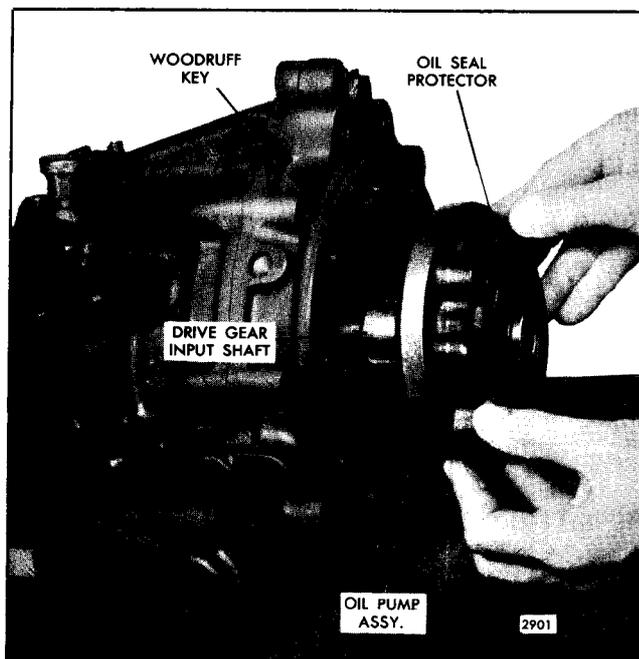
Installing Oil Pump Assembly on Input Shaft and Adaptor
